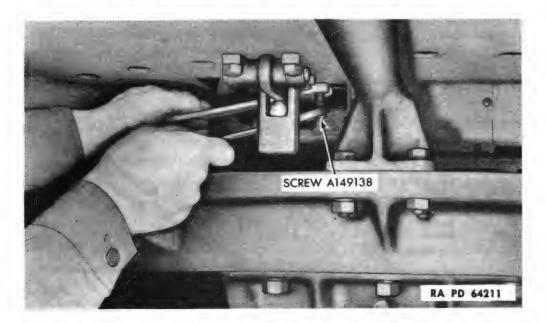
Adjusting Foot Firing Cable Pedal-Rear
